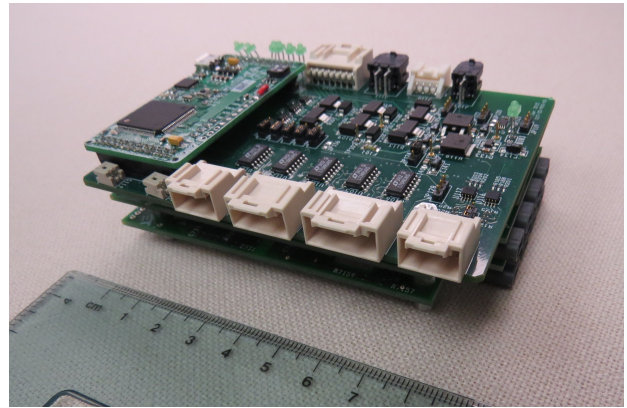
ECB and SCB assembly as the HNP controller unit.
